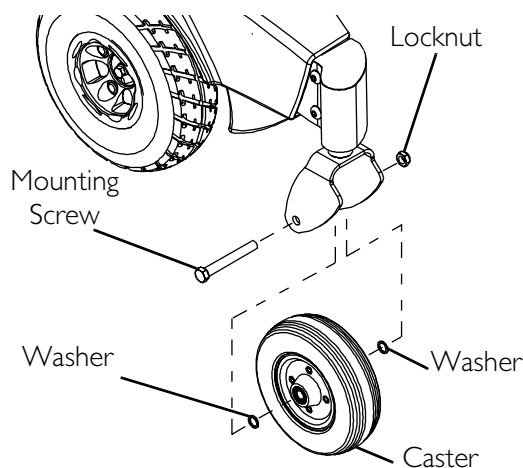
Replacing Front/Rear Caster Assemblies
